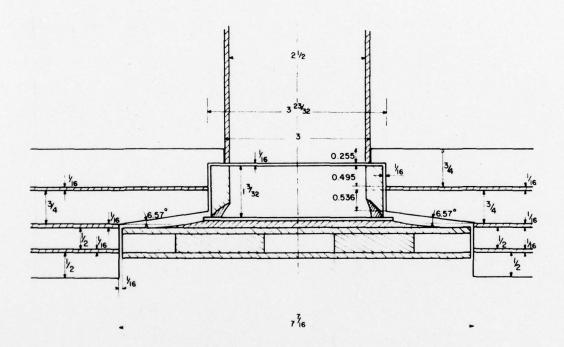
CROSS-SECTION OF THE BRONZE IMPELLER AND CASING
